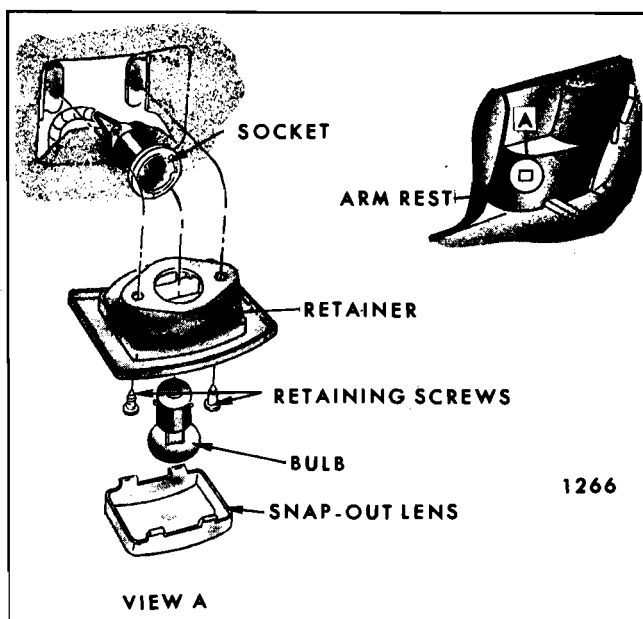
Rear Quarter Arm Rest Courtesy Lamp Assembly
